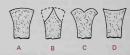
Suggested end designs for band iron. (A) Fan shaped; (B) Arrow head; (C) Fish tail; (D) Flared.
